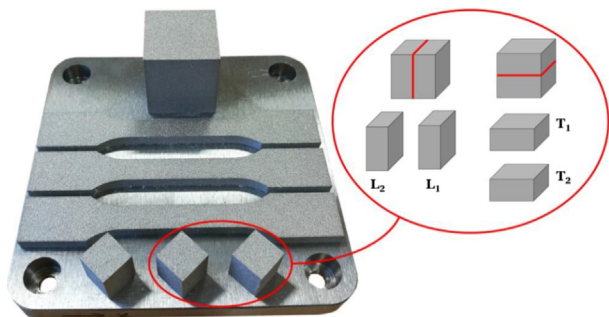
Test samples manufactured using SLM with 17-4 PH stainless steel.
